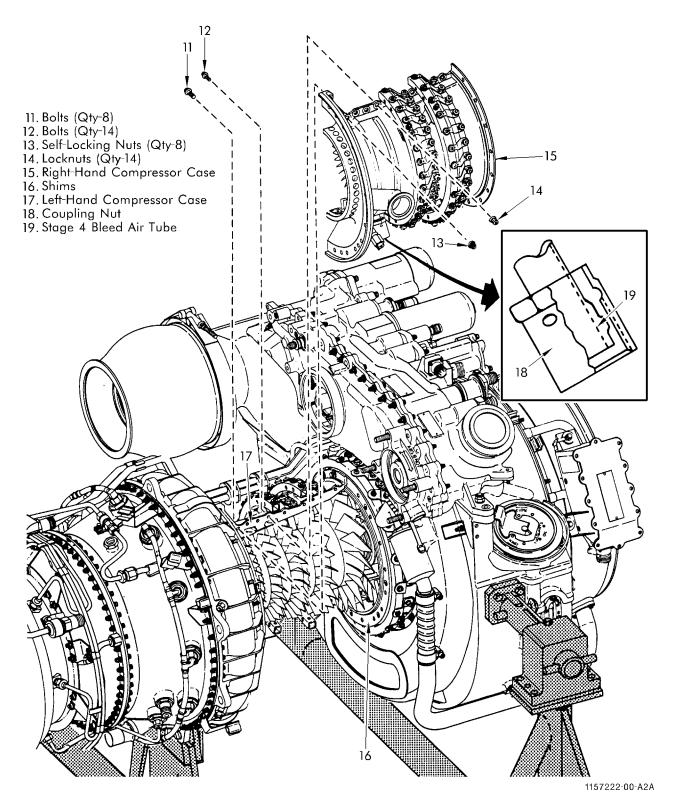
Right-Hand Compressor Case; Removal, Inspection, and Installation (Sheet 2 of 2)
